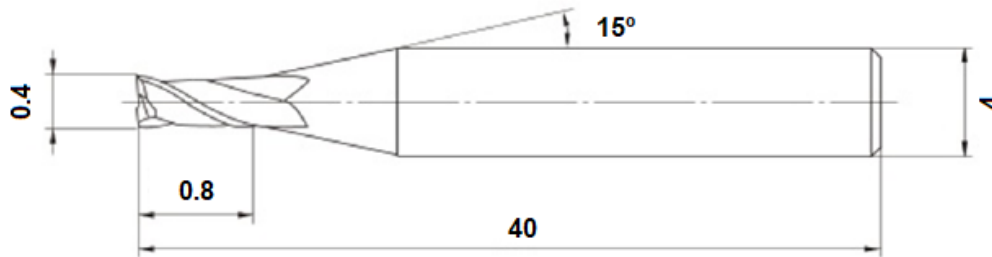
Dimensions in mm of the microtool used in the machining trials.
